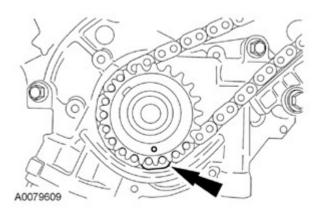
Locating Crankshaft Sprocket Flange Faces Forward Courtesy of FORD MOTOR CO.
